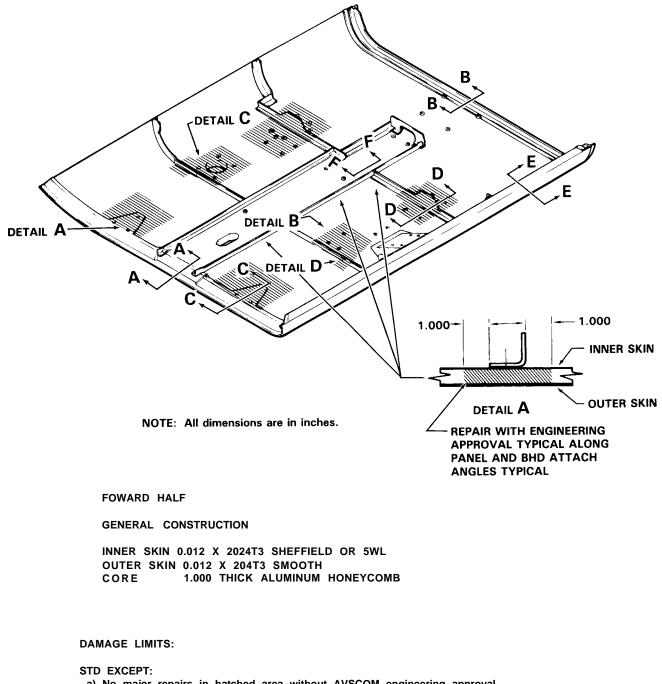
Honeycomb Panel — Forward Lower Cabin Shell Repair (Sheet 1 of 5)
